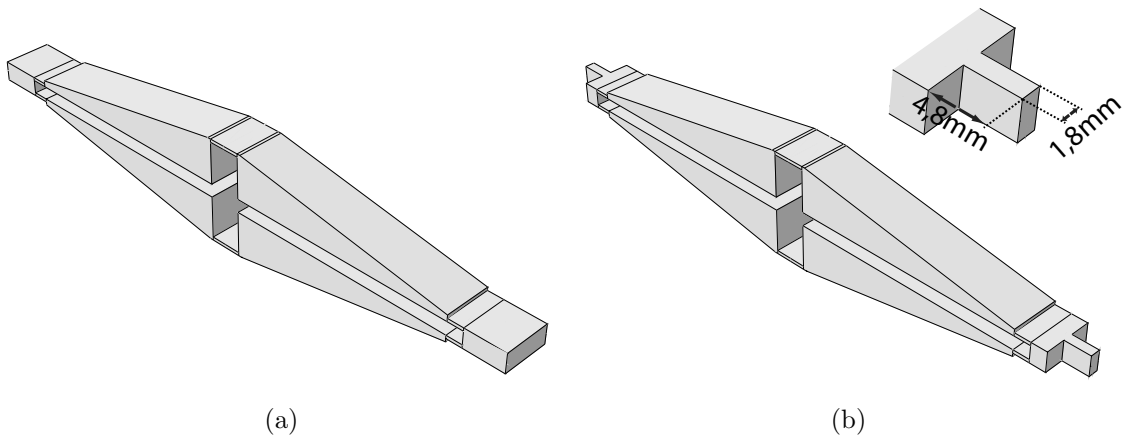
(a) The optimized mechanism that can only be used for 1D or 2D assembly. (b) The optimized mechanism with its two ends modified for 3D assembly.
